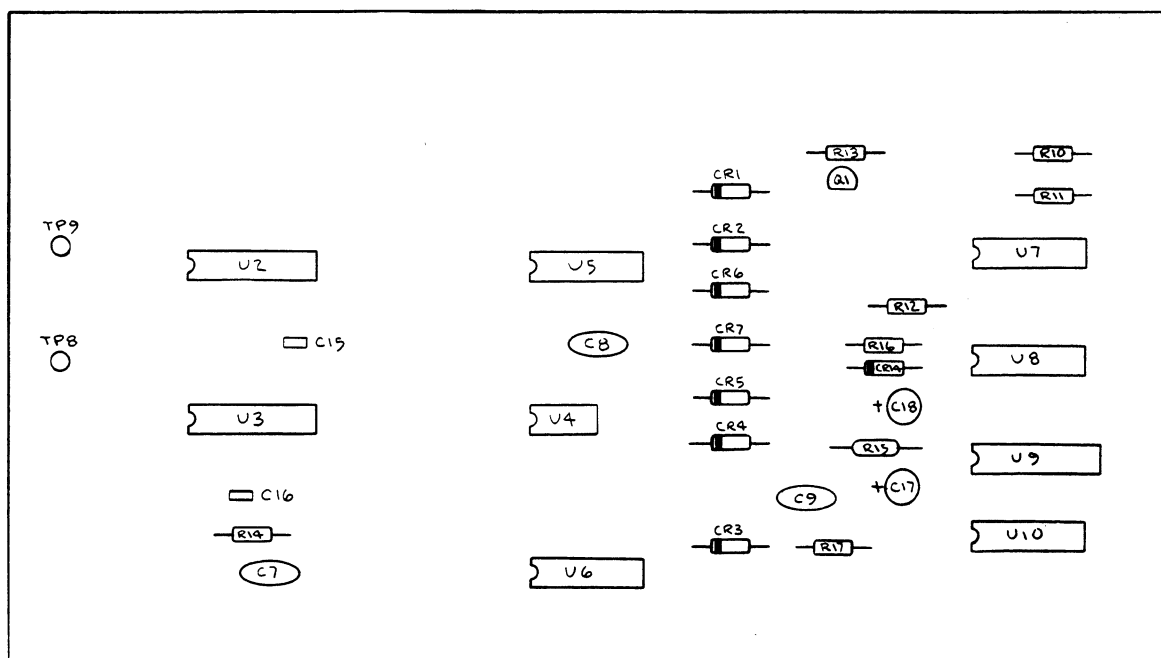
A16 Extended High Voltage PCB Assembly, Environmental Case
